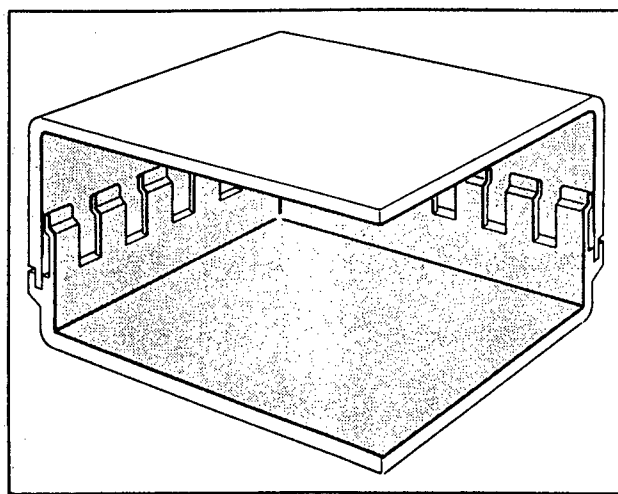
Use of half lap joints and injection molded contact fingers to achieve electrical contact.
